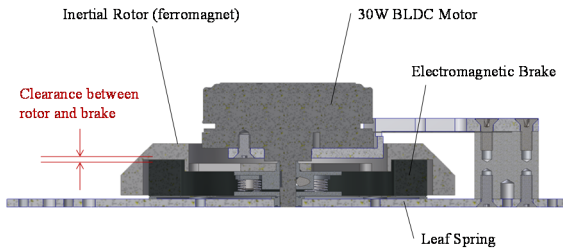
Cross-sectional view of our E-M-based wheel braking unit.
